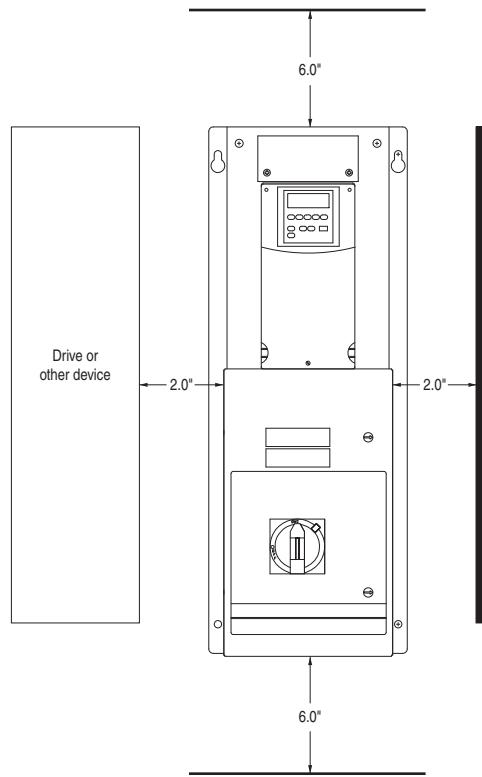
NEMA/UL Type 12 Minimum Mounting Clearances
